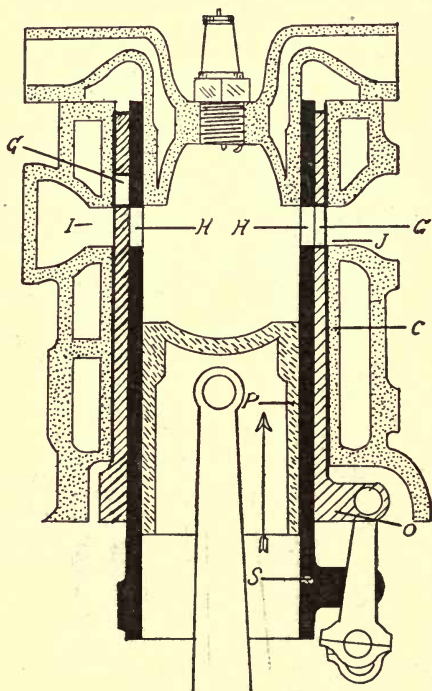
Knight Sleeve-valve Motor; Section to show Operation
